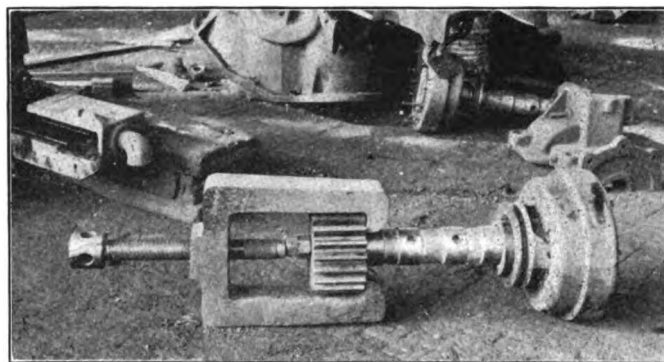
Screw puller for removing gears from stoker shafts and other similar work
